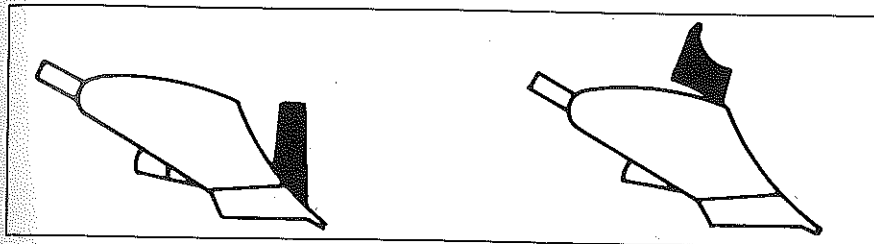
Body-mounted tools. left: coulter, right: trash board.
